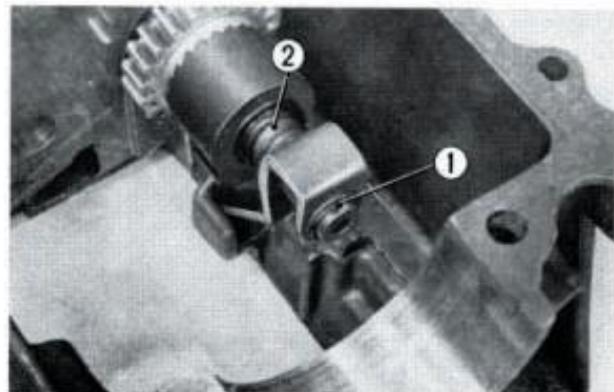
① 12 mm snap ring ② Kick starter shaft
